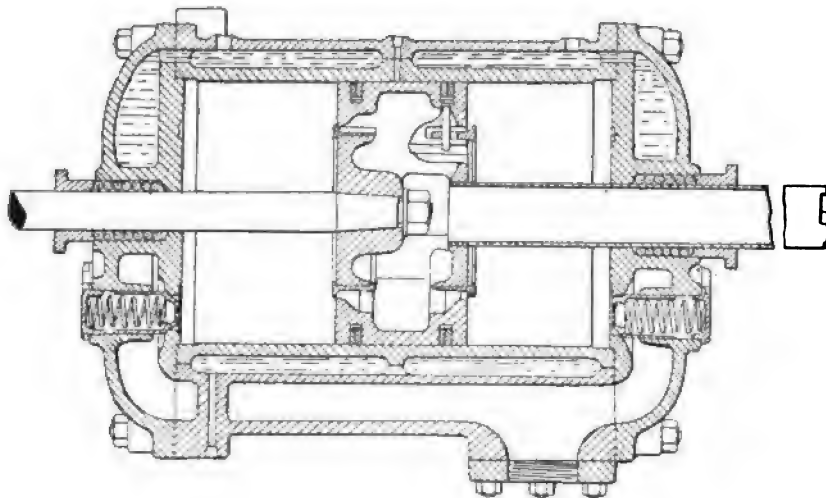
Ingersoll-Sergeant Piston Inlet Valves.
